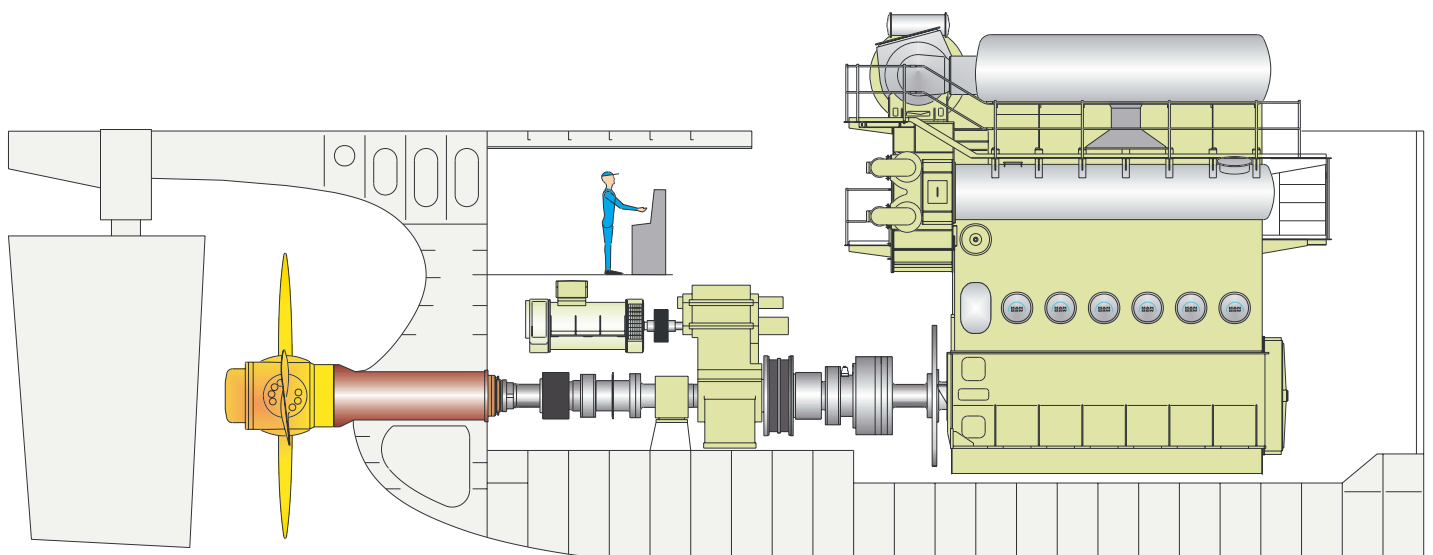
Propeller equipment type VBS - ODS (6S42MC engine, Tunnel gear, Alpha Clutch, VBS1380 propeller)
